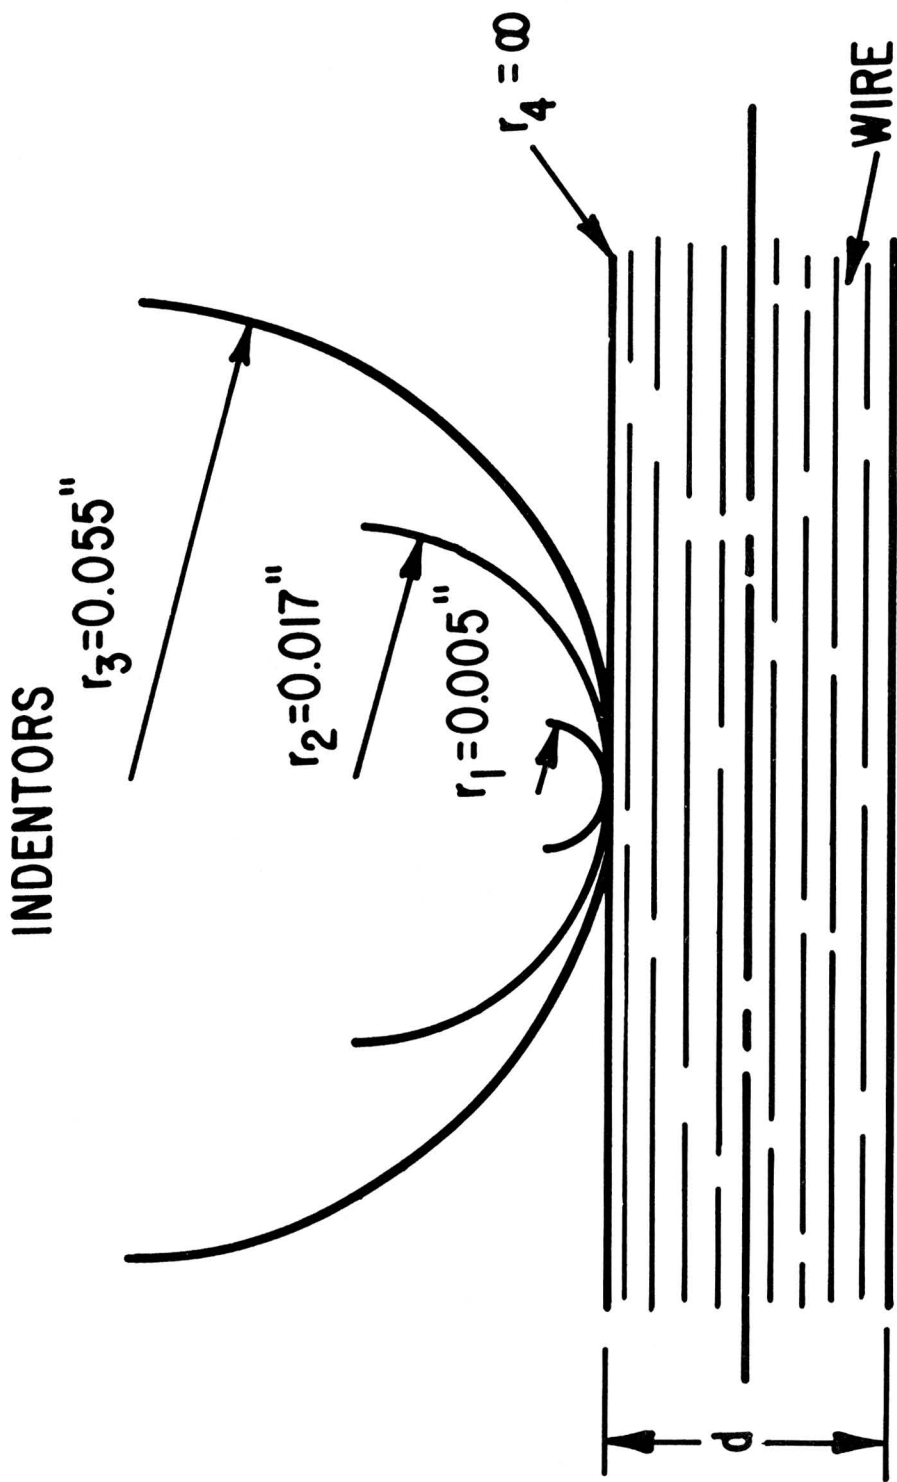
Definition of Indenter Radius, r , and Wire Diameter, d .
